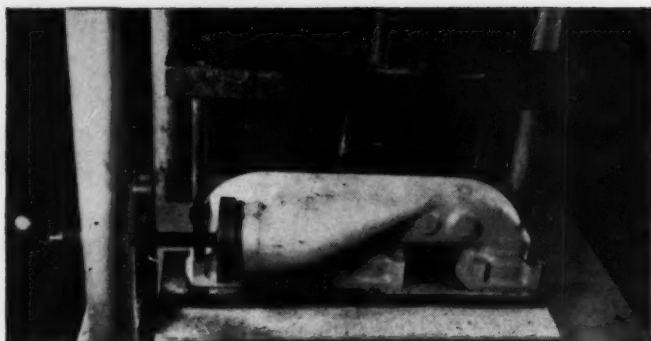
Small casting in place in a pressure testing machine. Openings in bottom and at one end of casting are closed and air pressure applied through passages in the base of fixture.
